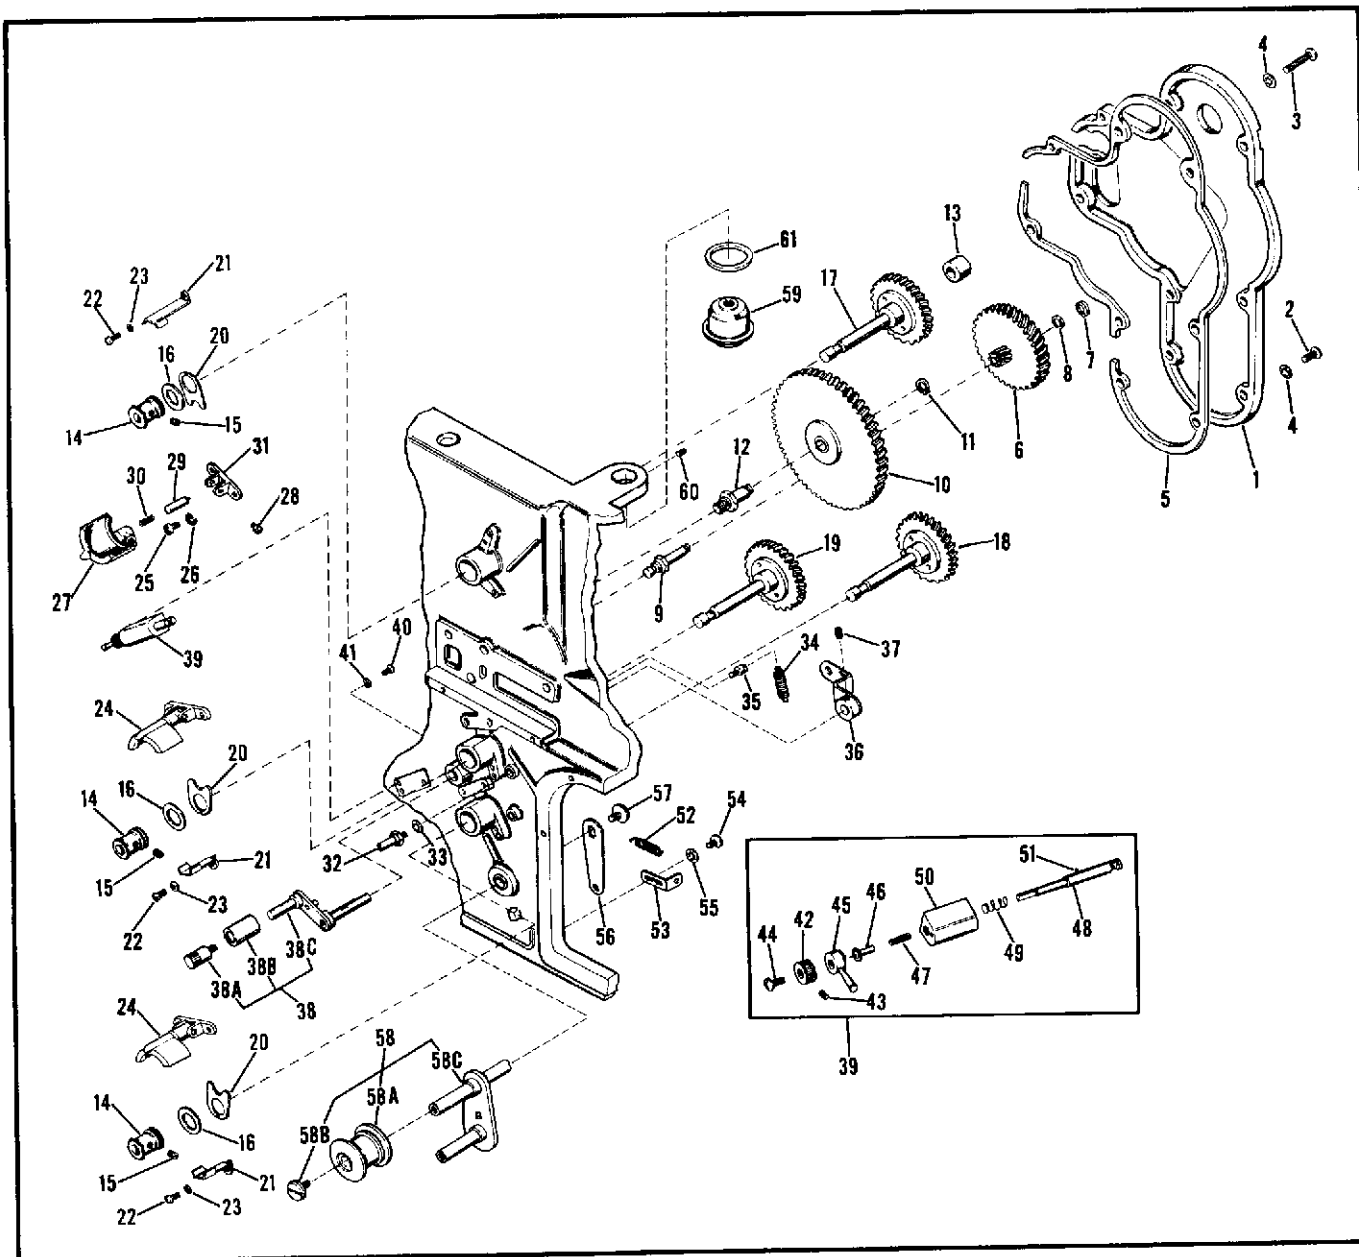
Removing Sprockets, Film Shoes and Gears
